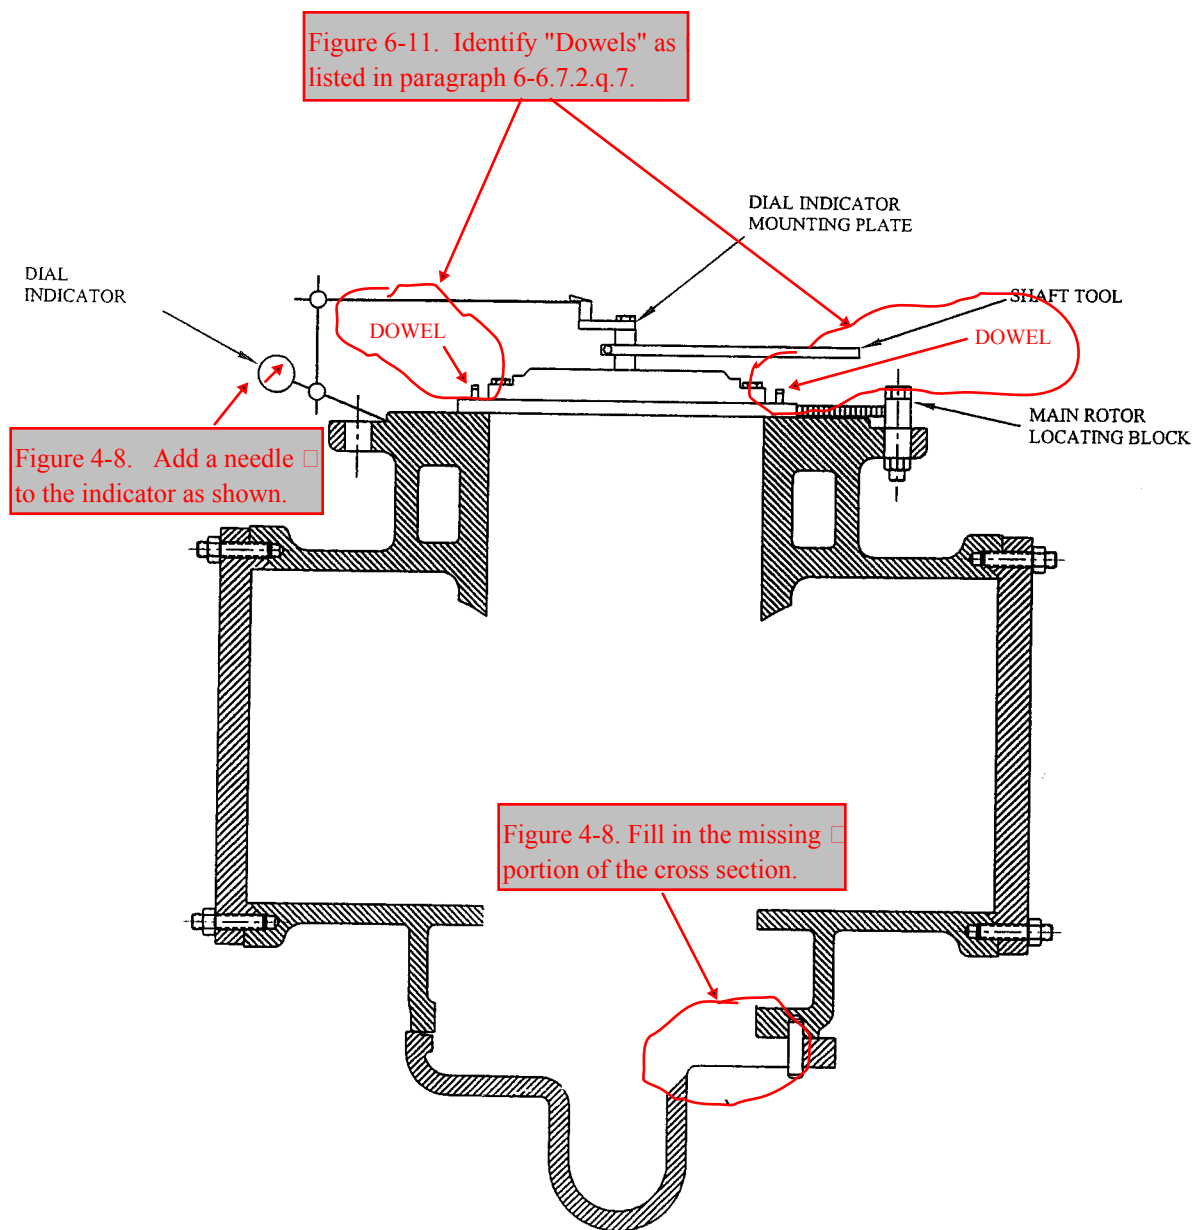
Main Rotor Assembly (sheet 1 of 2)
